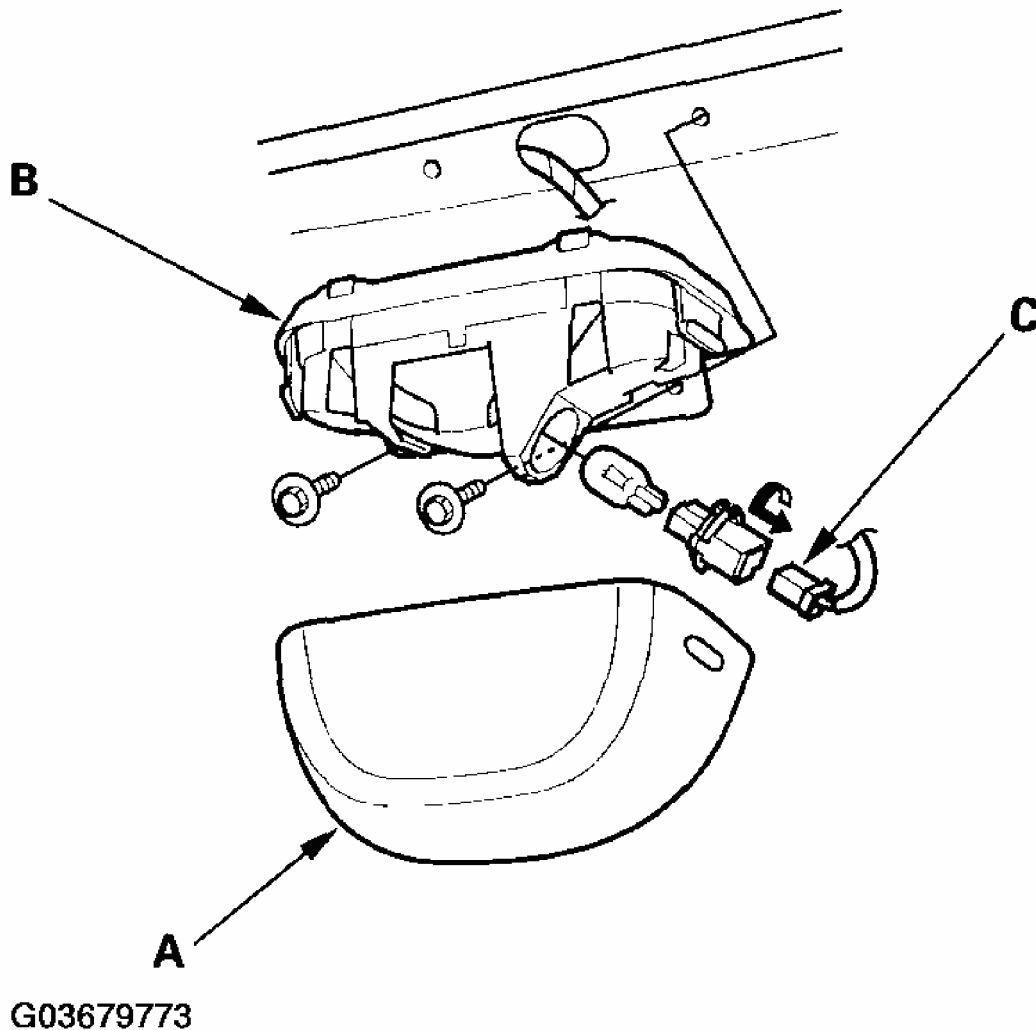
Pushing In Clips, And Removing Cover From Housing (High Mount Brake Light Bulb)
